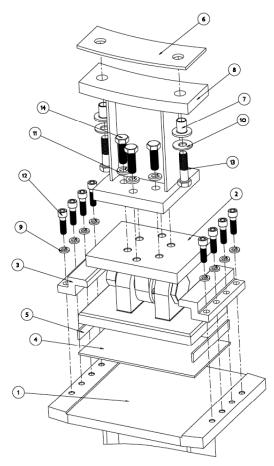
Spherical Bearing Assembly Interface with Stellarator Core
